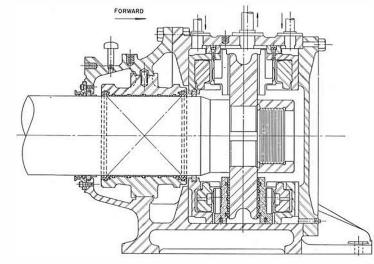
An unusual housing arrangement for the journal bearing and thrust bearing at the forward end of an electric propulsion motor.
